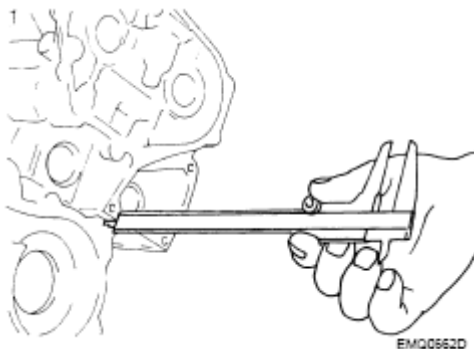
Checking Distance Between Front End Faces Of Cylinder Block And Cylinder Head (Left And Right Banks)
